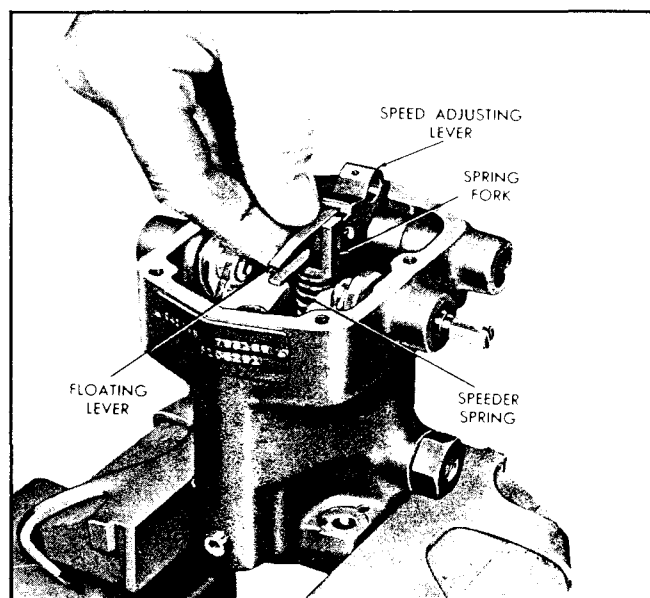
Removing Speed Adjusting Lever, Floating Lever, Spring Fork, Speeder Spring and Pilot Valve Plunger Assembly
